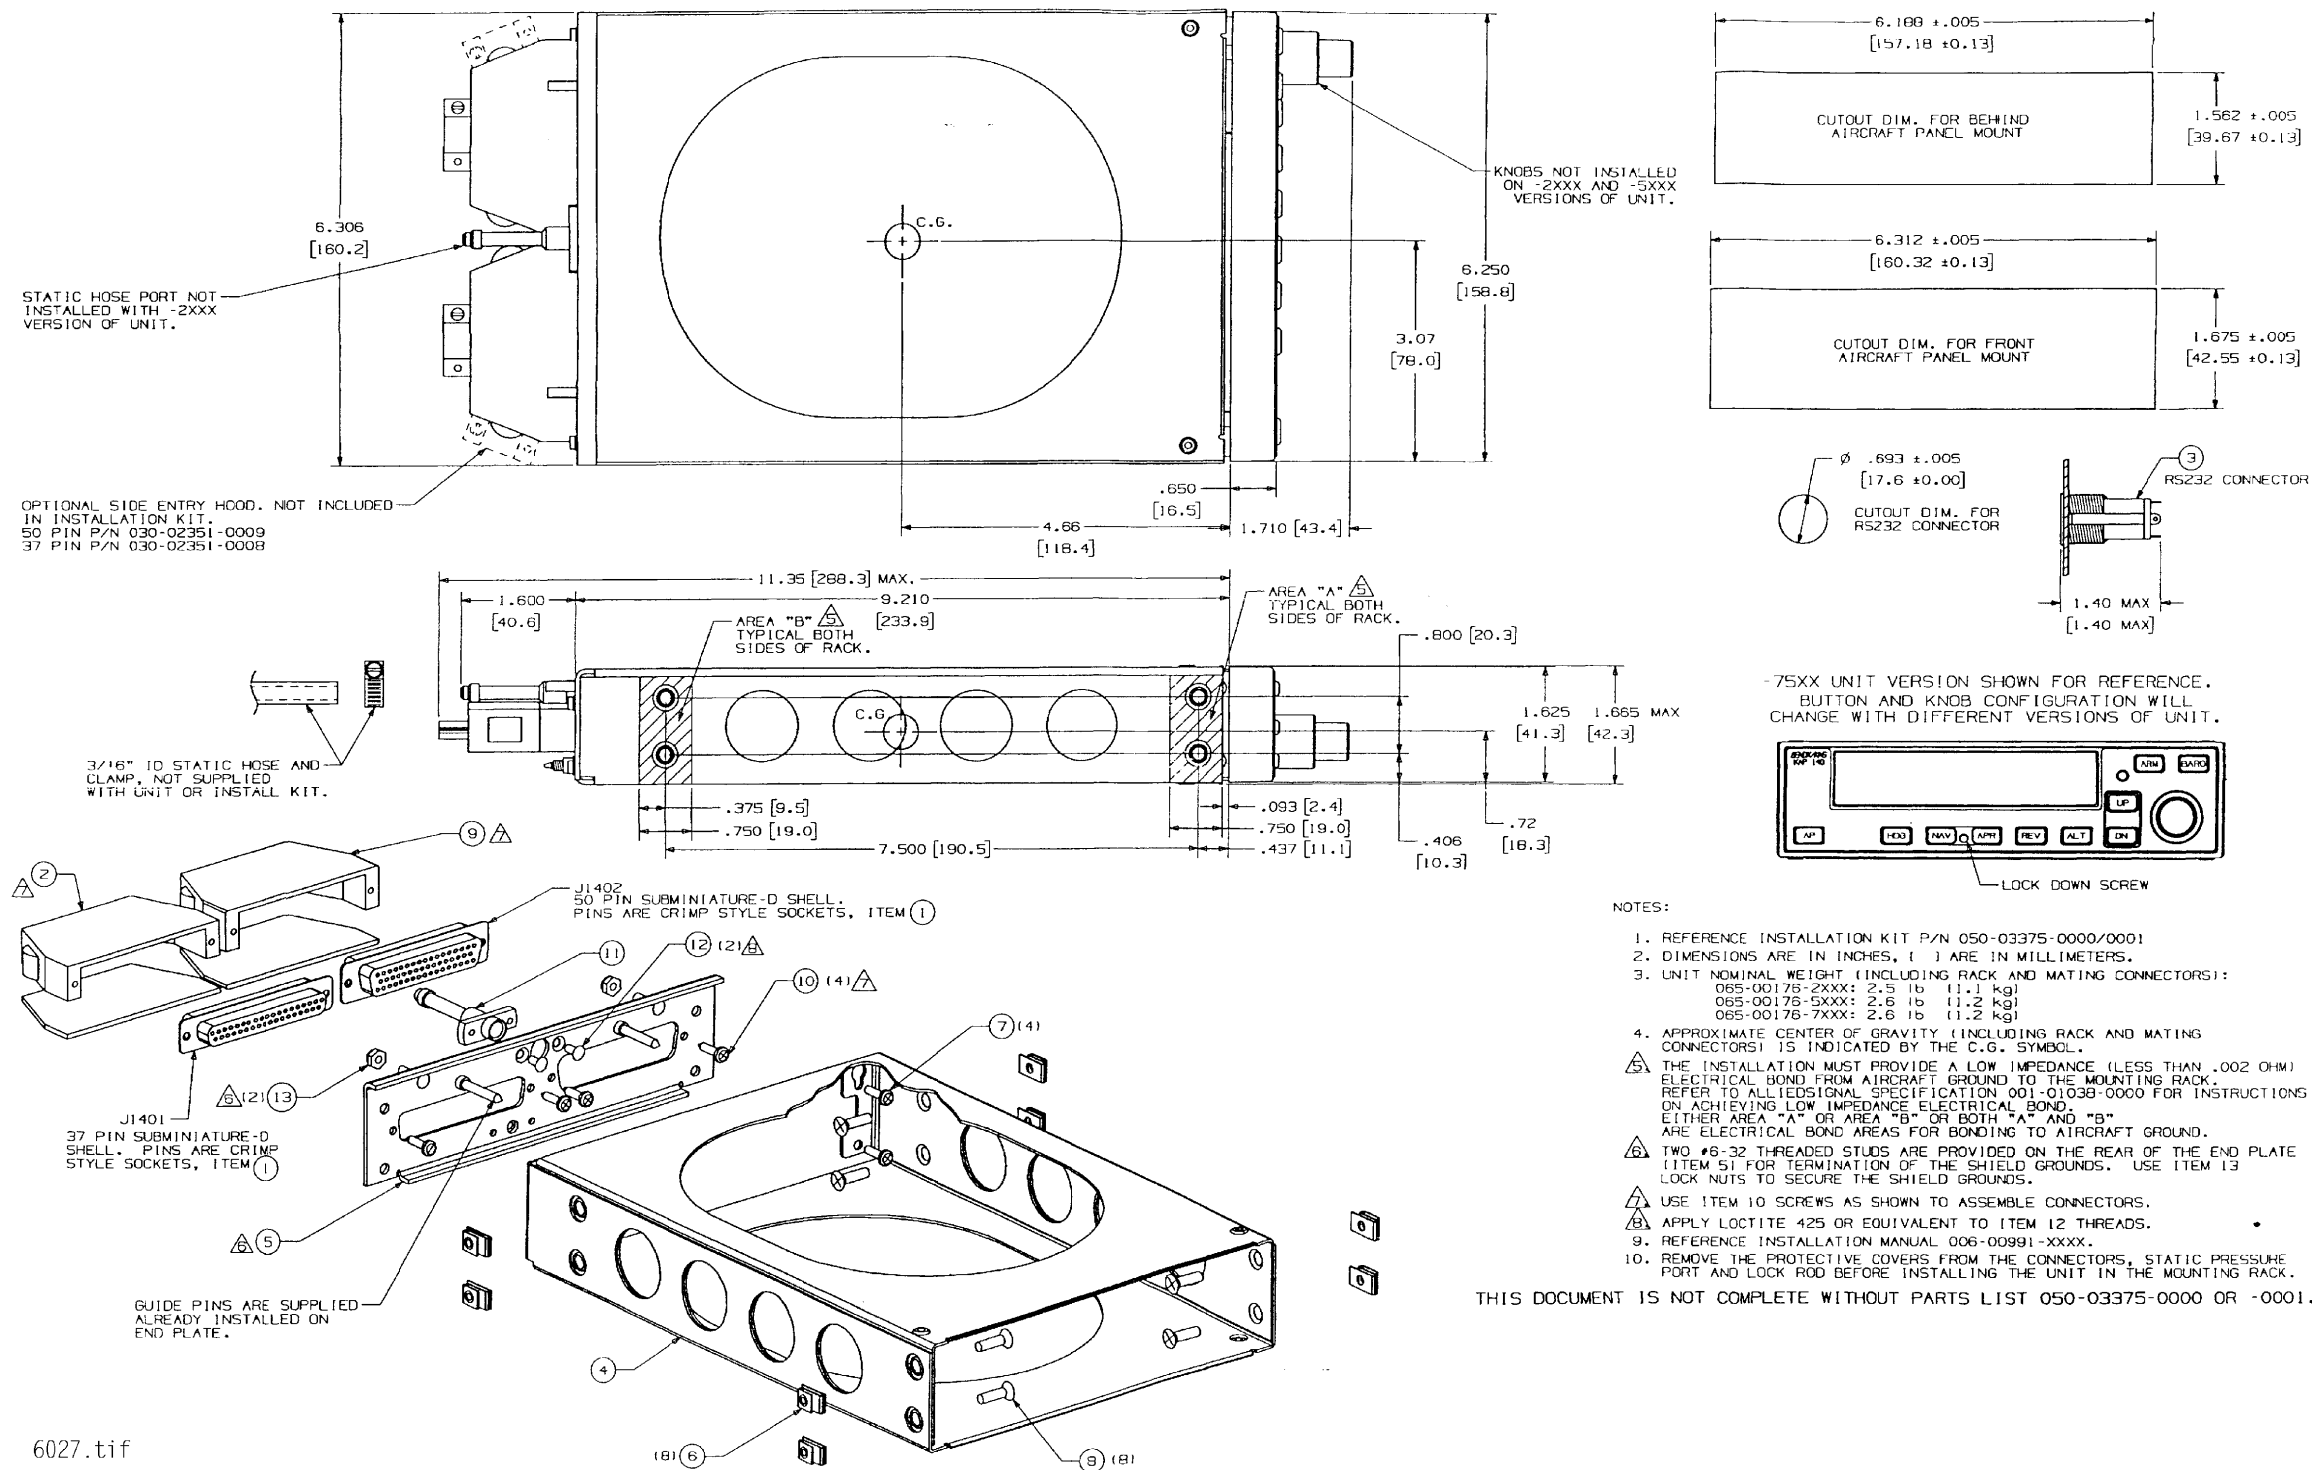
KC 140 OUTLINE AND INSTALLATION DRAWING
